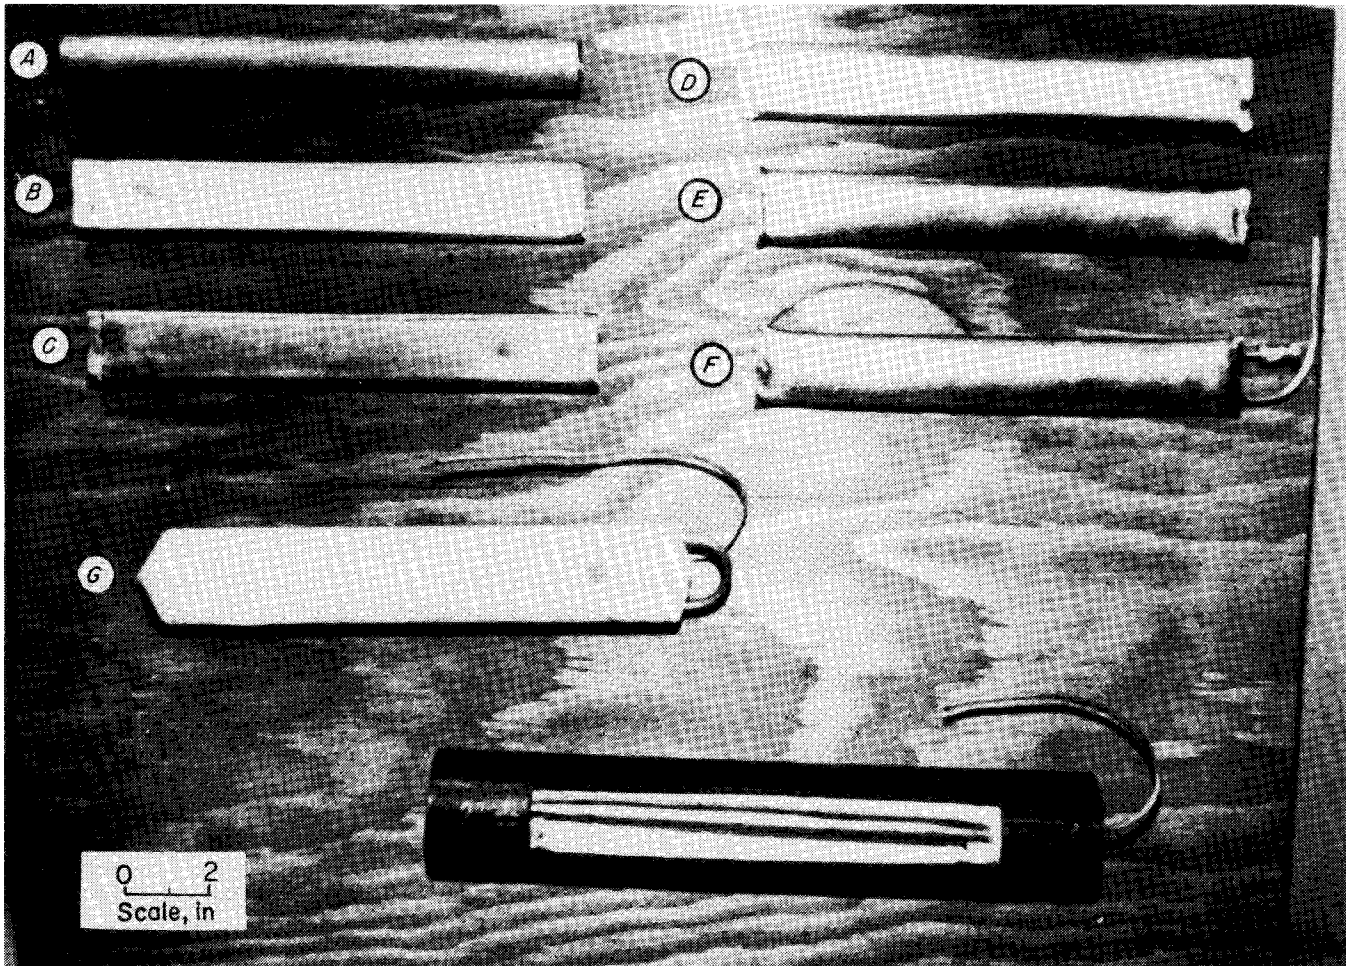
Steps in fabrication of an encapsulated flat borehole pressure cell. *A*, Copper tube cut to length; *B*, tube flattened to 1/4-in opening; *C*, top half of ends cut; *D*, top half of ends removed; *E*, bottom of ends folded up and brazed to top; *F*, fluid-filling and pressuring and gauge tubes attached; *G*, cell encapsulated in plaster.
